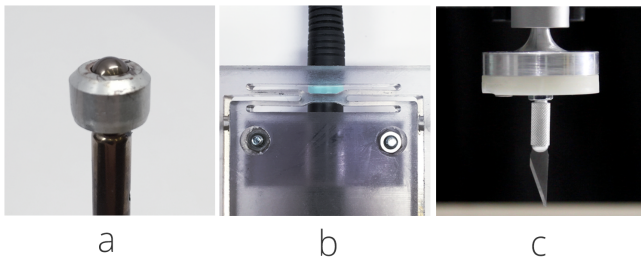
The sealer uses a ball transfer (a) and dampens the tool head at the pen holder (b). The tool head can be changed to be a knife for cutting sealed material (c).
